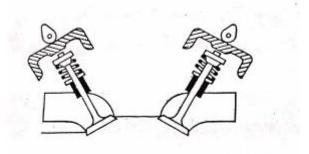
Double overhead camshaft-operated mechanism with inverted bucket type followers
